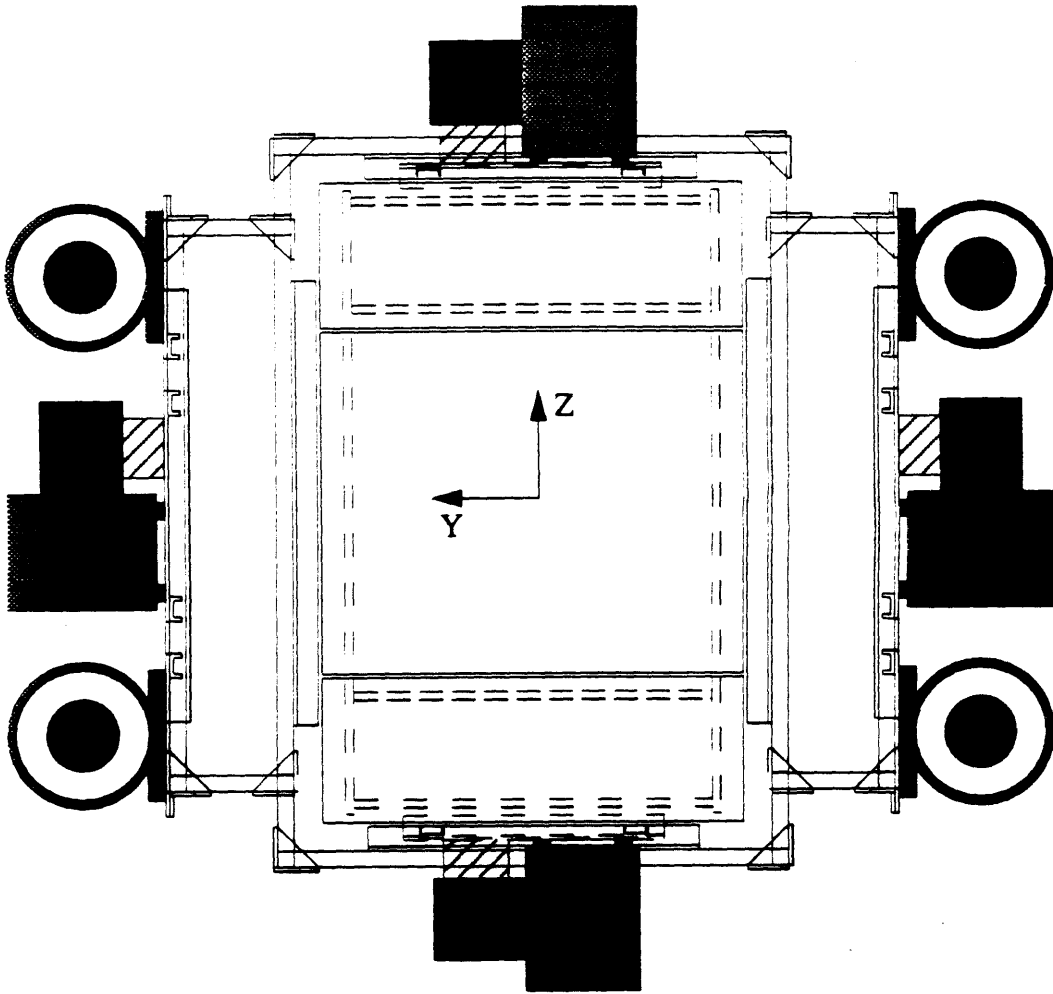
Rear View of STAR Thruster and Balancer Layout
